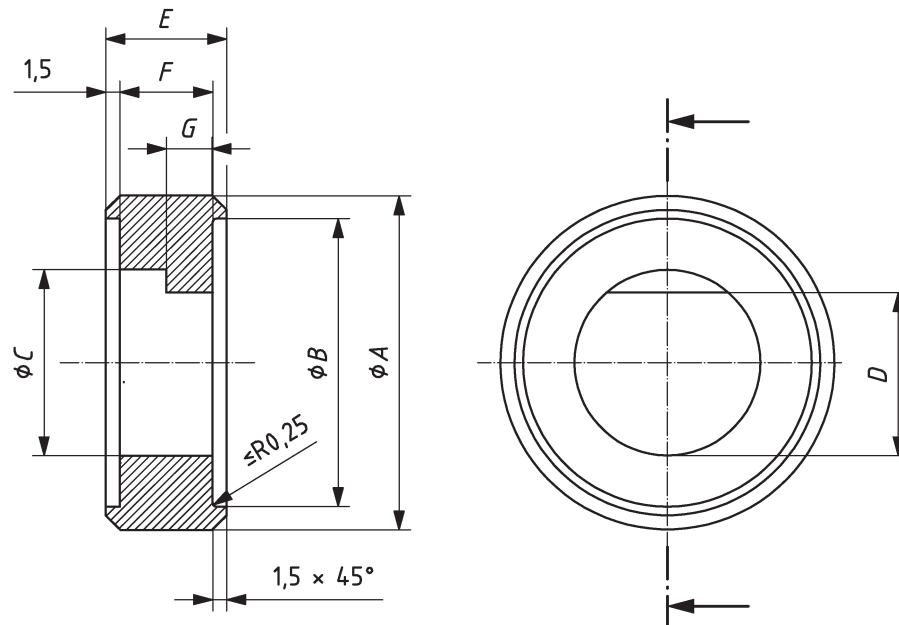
Swirl generator for a threaded type disturbance generator, with dimensions as set out in [Table B.3](#)
